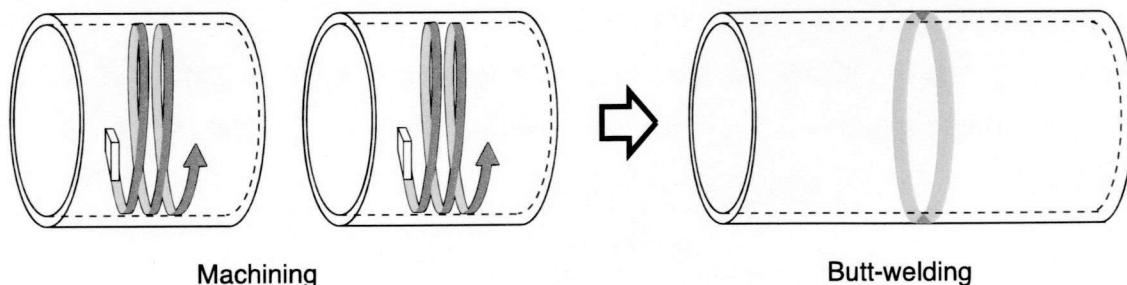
Manufacturing processes for welded pipe joint in nuclear power plants.
